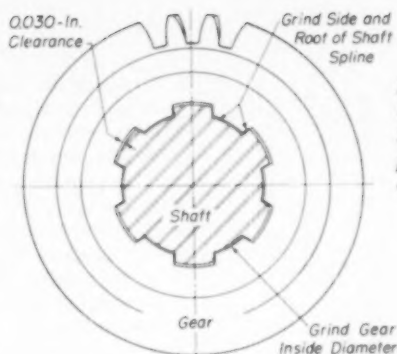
Amount of Finish Grinding Usually Necessary on Straight-Sided Spline of Gear and Shaft. Gear is plug quenched; shaft is quenched in open tank. Both are carburized jobs
